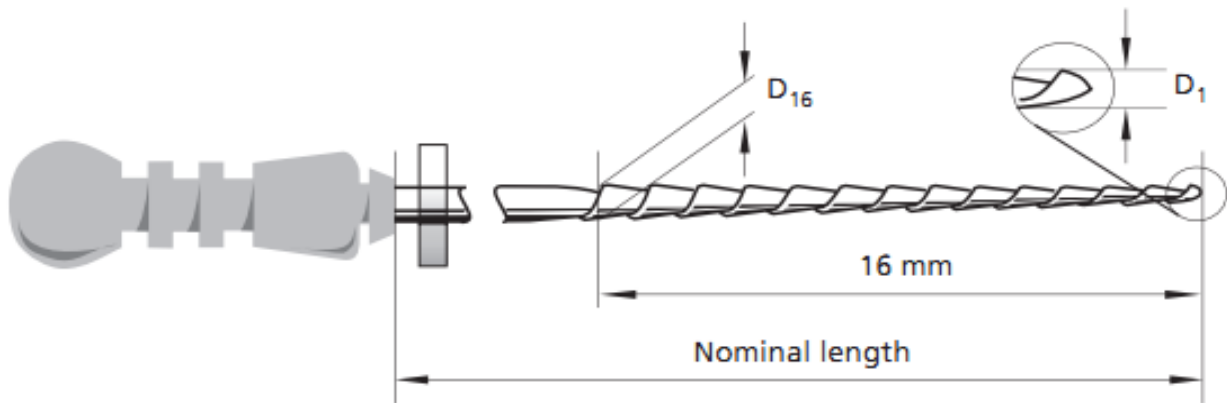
Drawing showing a hand file (ISO-sized; 2 % taper) with the distances D1 and D16 marked
